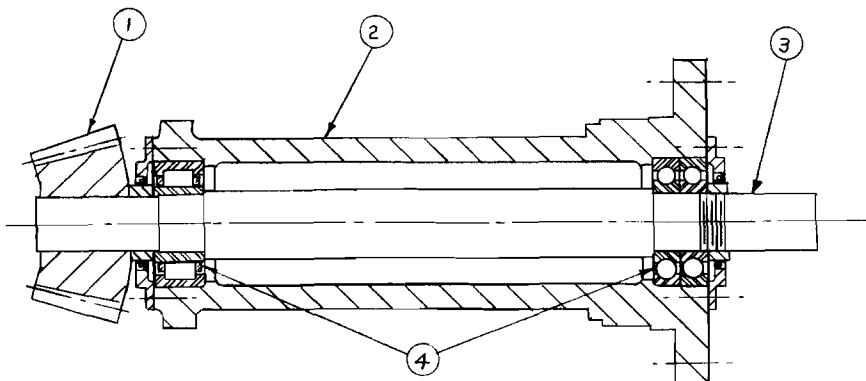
Pinion-shaft assembly (courtesy of Allis-Chalmers).
